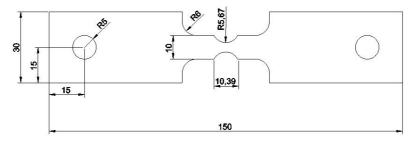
Geometry of specimens (notched specimen) adopted for tensile tests
